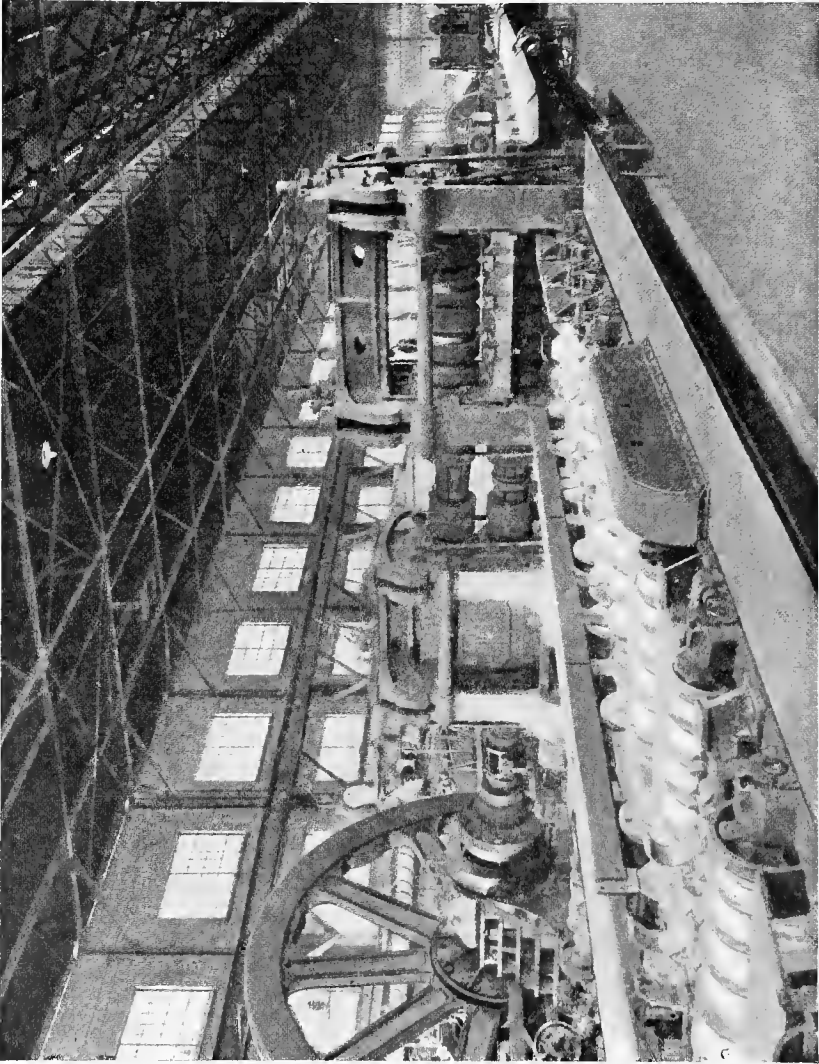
92-inch Merchant Mill installed by The United Engineering and Foundry Company.
